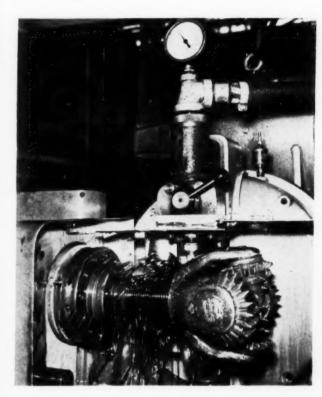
12×45 thread grinder equipped with 20-hp wheel motor for grinding threads on oil-well rock drills
